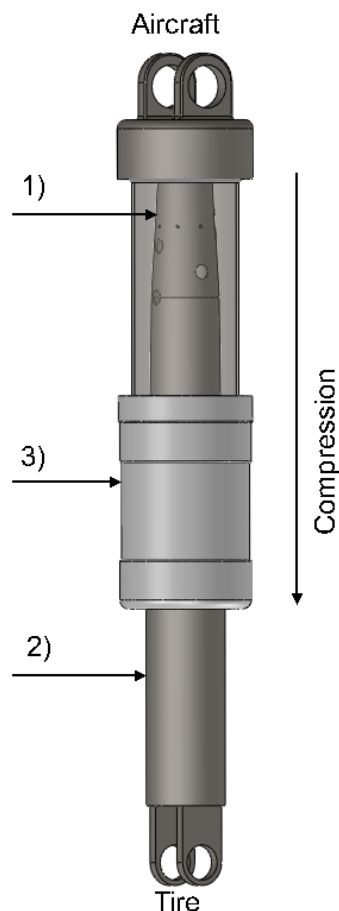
The modified oleo-pneumatic shock absorber assembly.
